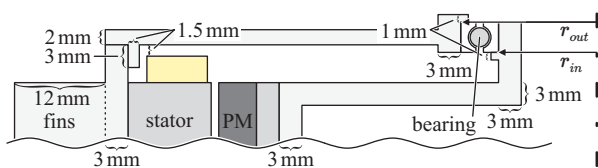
Sectional drawing of an internal rotor machine including the electromagnetically inactive materials. The magnets and rotor core are mounted on a 3 mm thick hollow shaft. The stator housing features cooling fins, which have a thickness of 1 mm, a height of 12 mm, and a spacing of 3.5 mm in between. The bearing shields are approximated as 2 mm thick discs.
